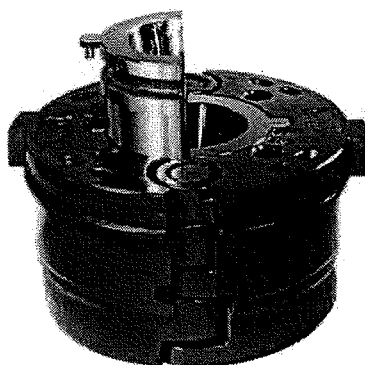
MPCH Hinged Pin Drive Master Bushing
